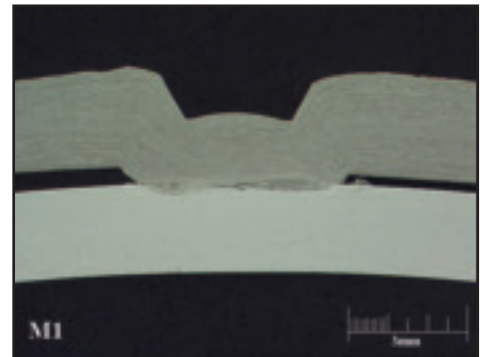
Macrosection of a projection weld between 6111 (top) and 6061 (bottom) aluminum alloys.
